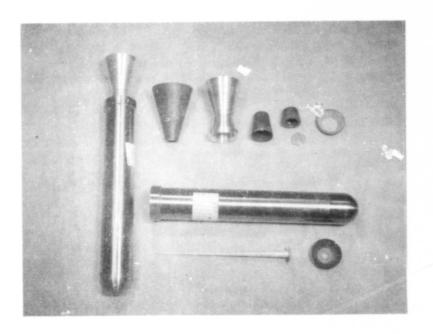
PHOTOGRAPH OF CROW MOTOR PARTS.
